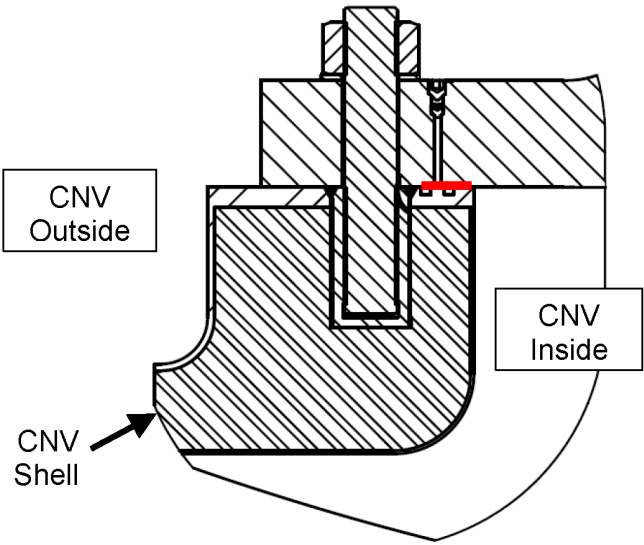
Steam generator inspection (CNV30) flange and cover bolted opening
